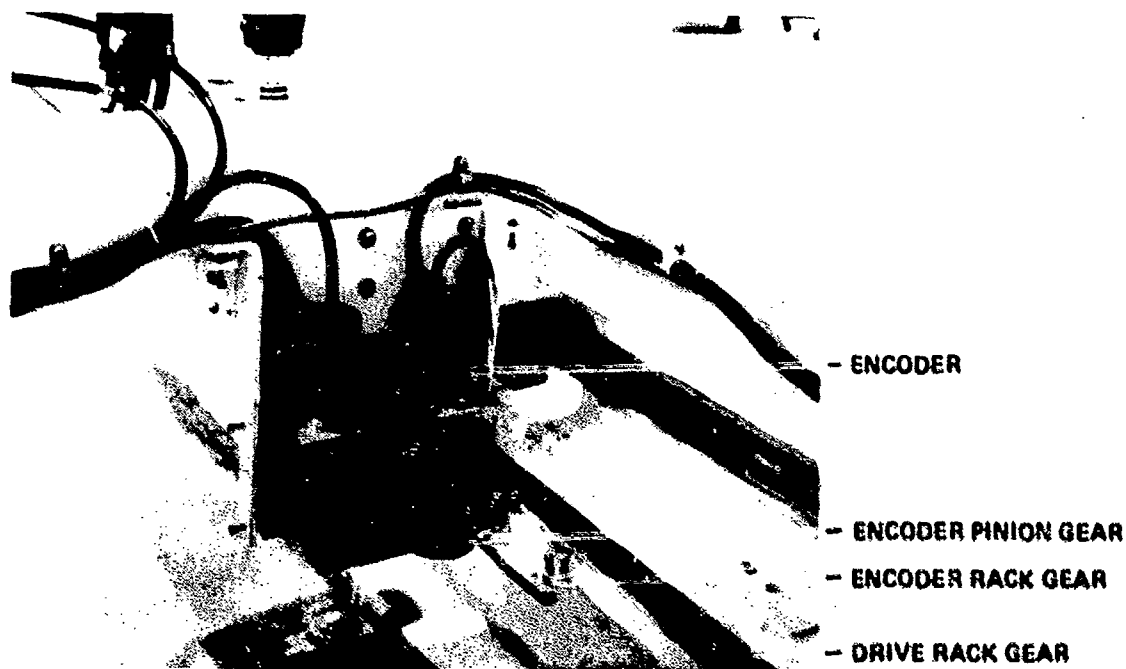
Tower-Mounted Encoder Assembly for X-Axis.
